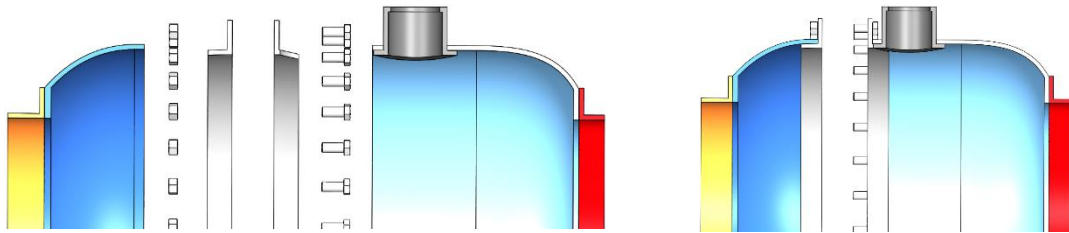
Simplified Assembly view (step 1)      Figure 204 – Simplified Assembly view (step 2)
